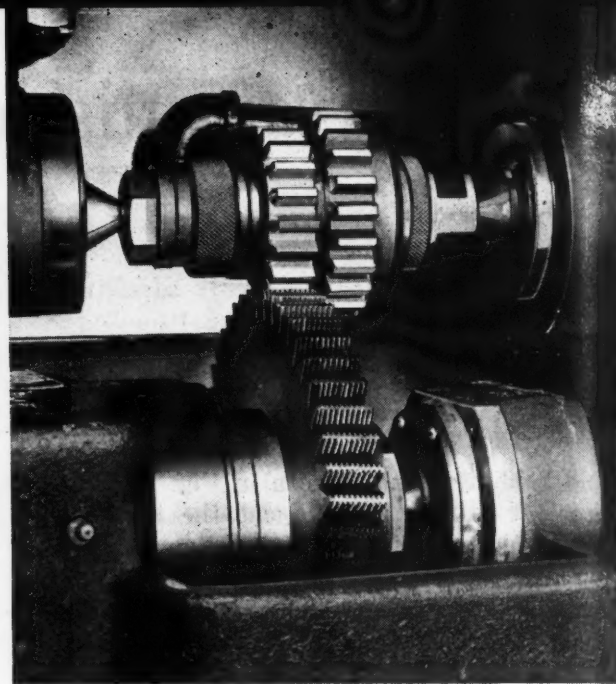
Close-up View of an Under-pass Type Shaving Operation being Performed on the Eighteen-tooth Step Gear of the Reverse Idler
